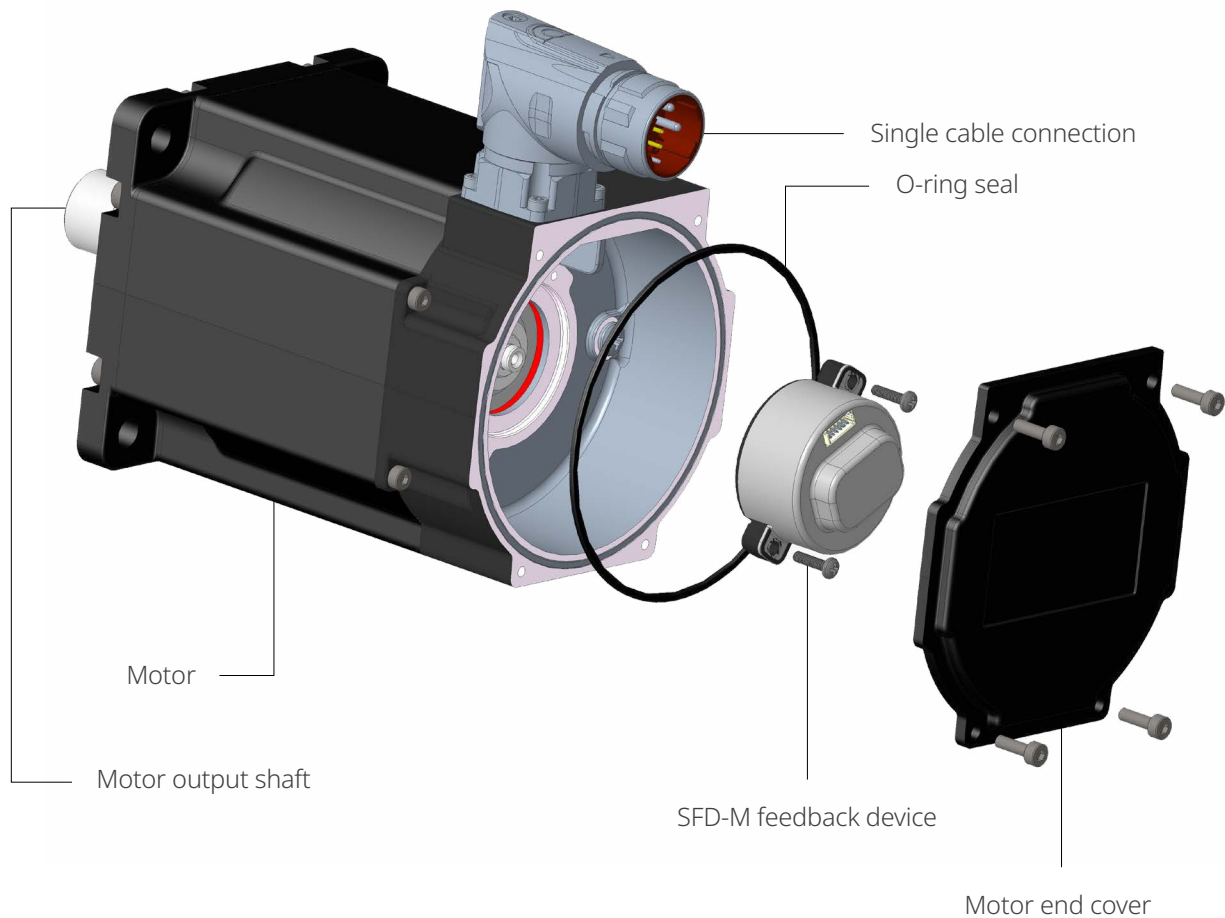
Exploded view of Kollmorgen AKM2G servo motor with SFD-M feedback
